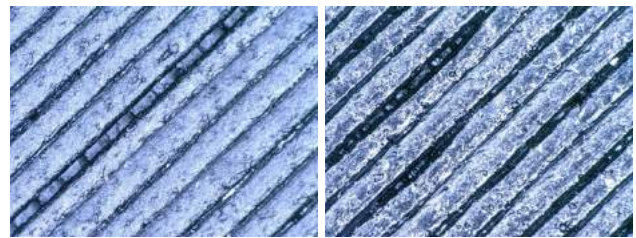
PLA 0.4 mm 100x Zoom Horizontal
